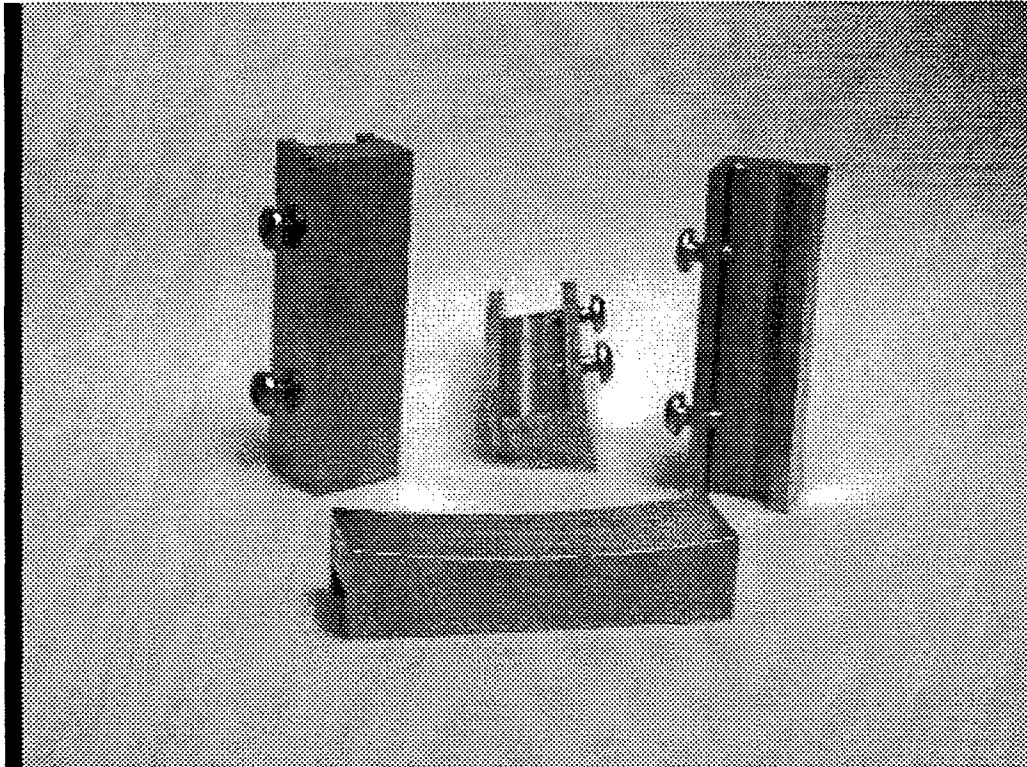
Machined "shoes" designed to accommodate surfaces having a curved shape—in this case a 12.75 inch diameter pipe. We are currently manufacturing what we call a "shoe rack," (see Figure 9 below) which is an assembly that contains all four shoes in a flexible frame. This frame is designed to be attached to the four-pole yoke core as a single unit, instead of having to attach each shoe one at a time. Thus shoe-racks for different applications can, in principle, be prepared ahead of time and used repeatedly to perform inspections on "identical" parts, which they were designed to fit.
